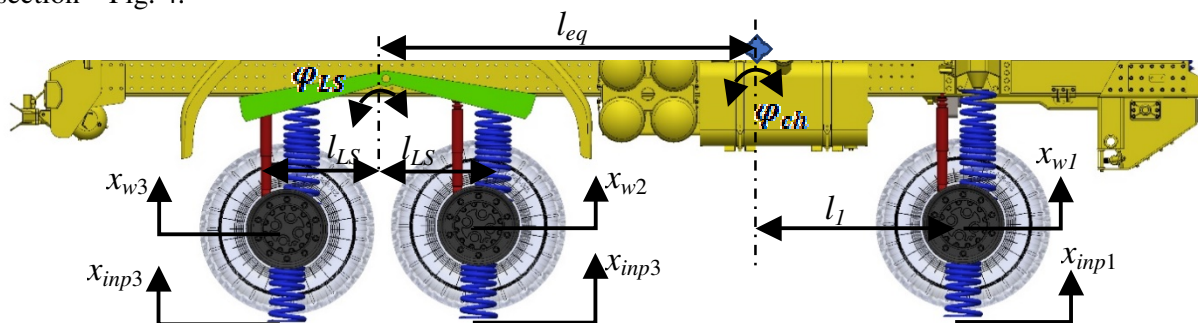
Half truck schematic system with the tandem rear suspension – bright green is the beam element
